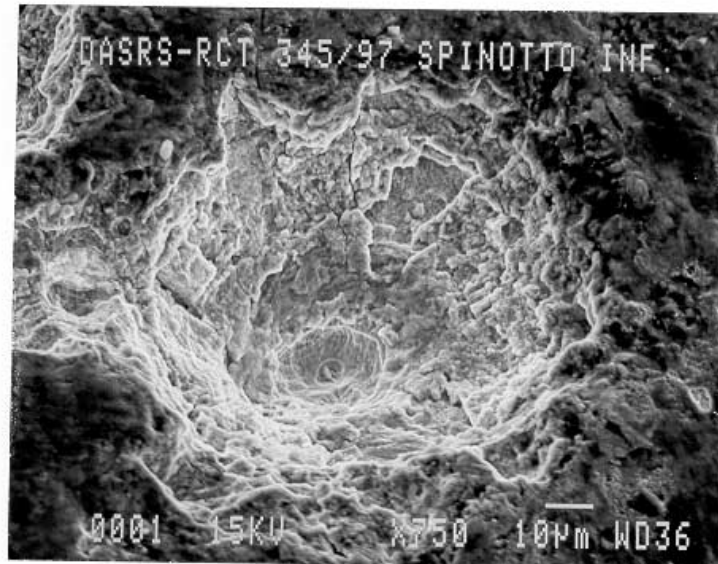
Fretting Corrosion on the MB.339 Landing Gear spine
